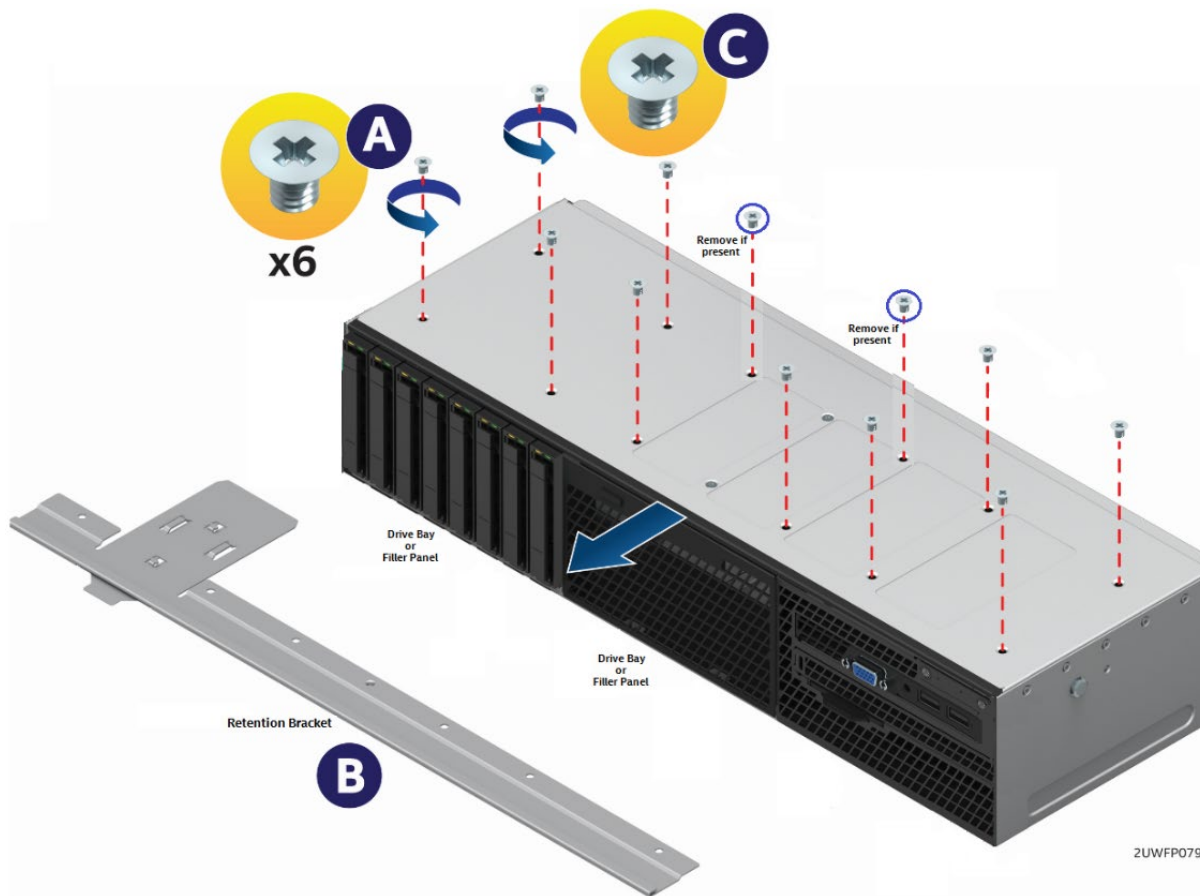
Drive Bay Disassembly – Retention Bracket Removal
